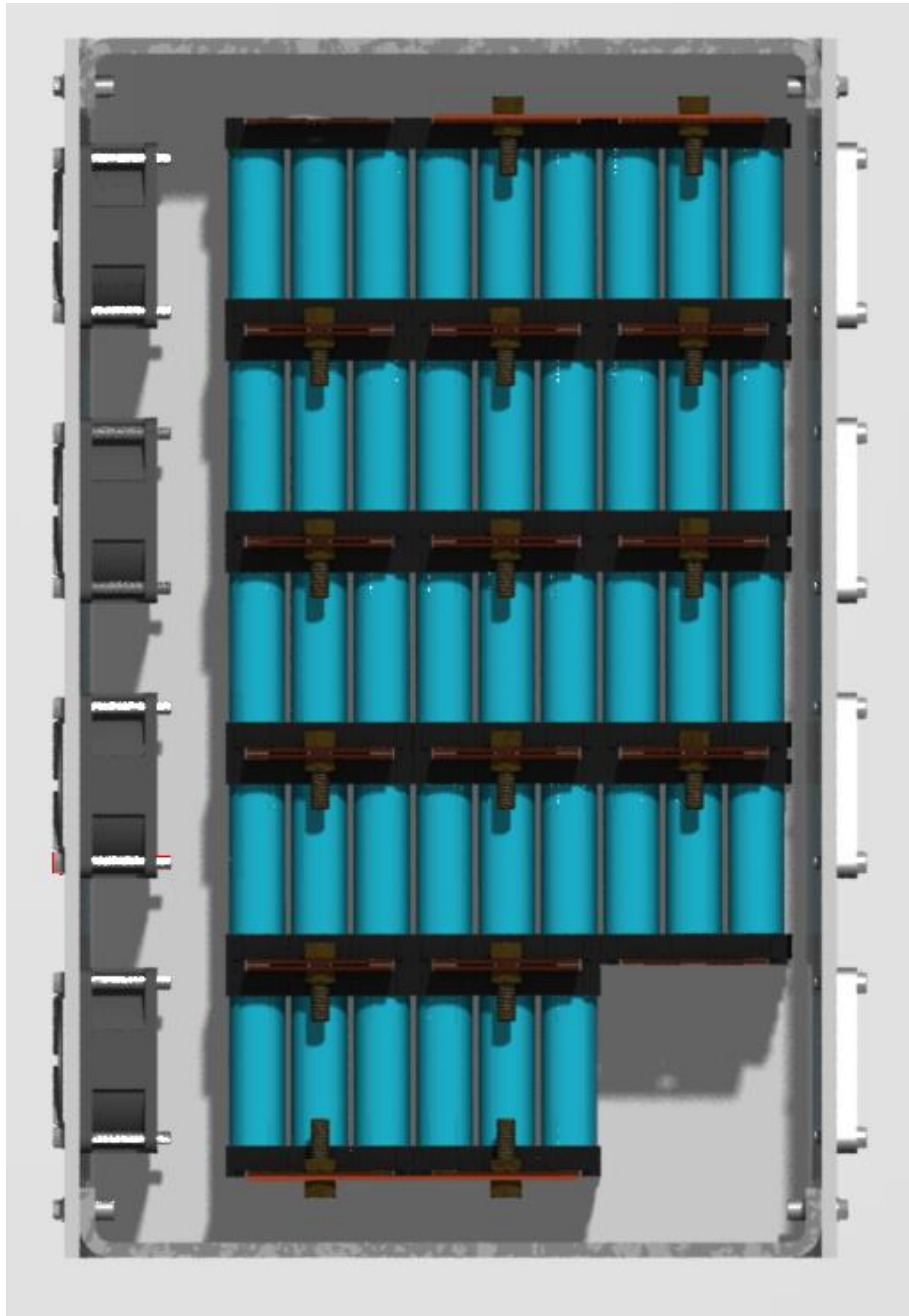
The top-view of the fully assembled ESS inclusive of the enclosure, BARR, finger guards, VF's, and ACF's.
